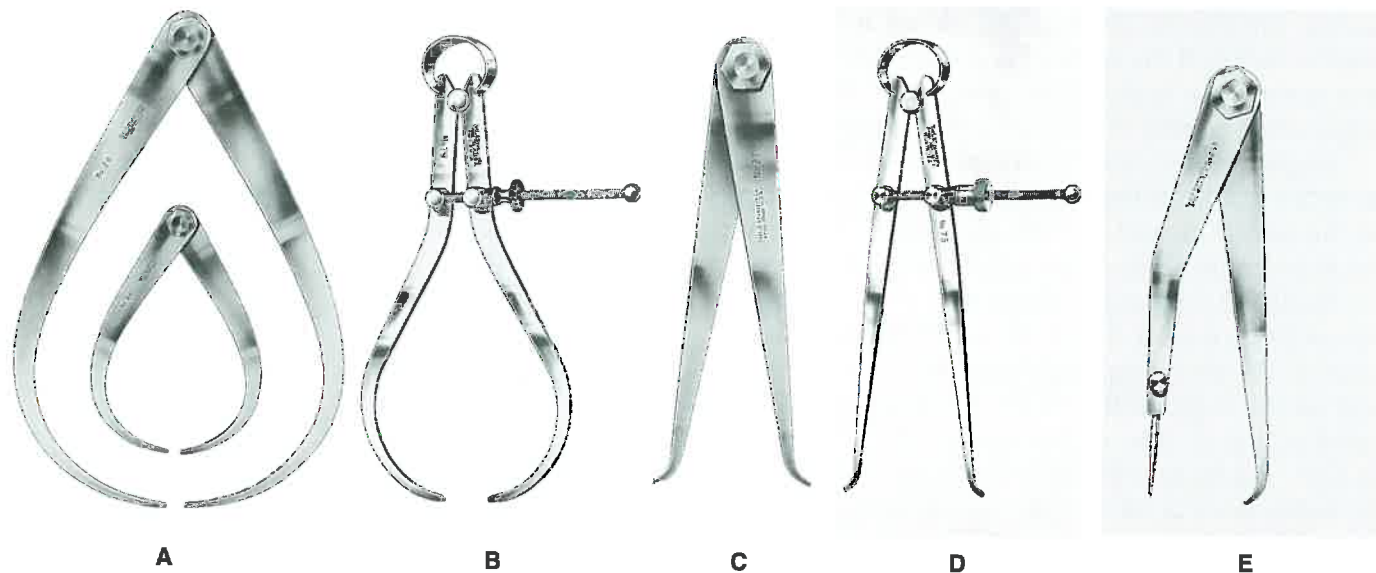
Calipers for transferring outside and inside measurements and parallel lines. A—Firm joint outside calipers. B—Bowspring outside calipers. C—Firm joint inside calipers. D—Bow spring inside calipers. E—Hermaphrodite calipers. (The L.S. Starrett Co.)
